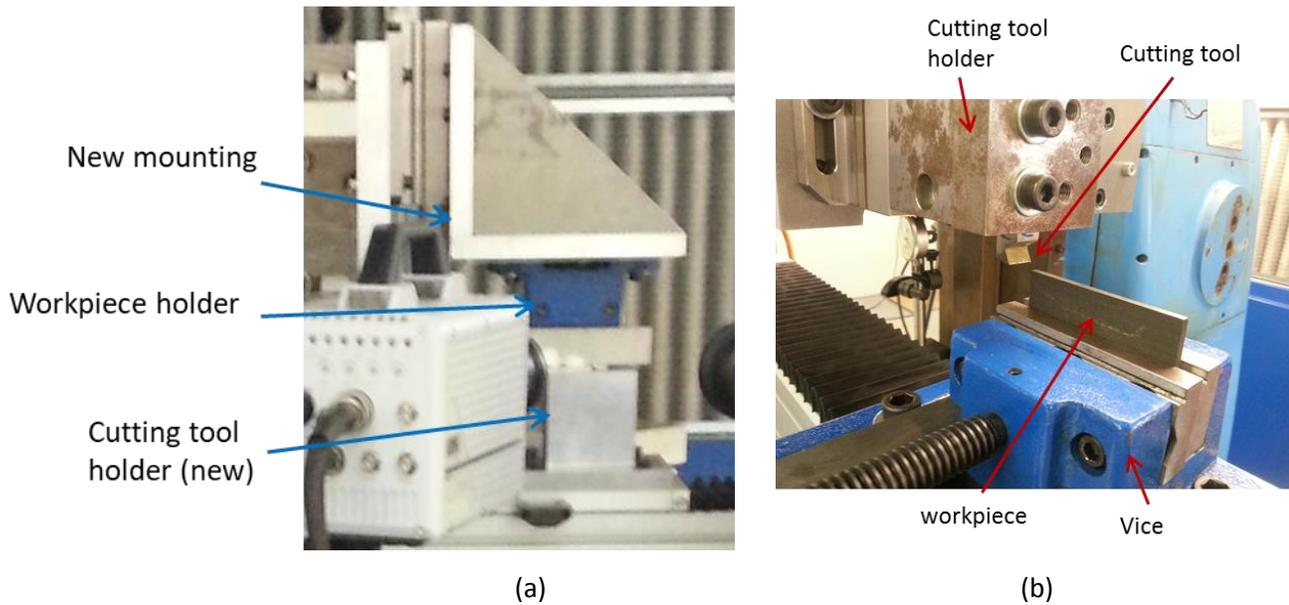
(a) New mounting and (b) the old mounting to hold workpiece and cutting tool
